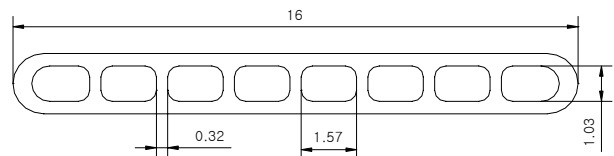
Cross-sectional view of the microchannel tube used in this study (unit : mm)
